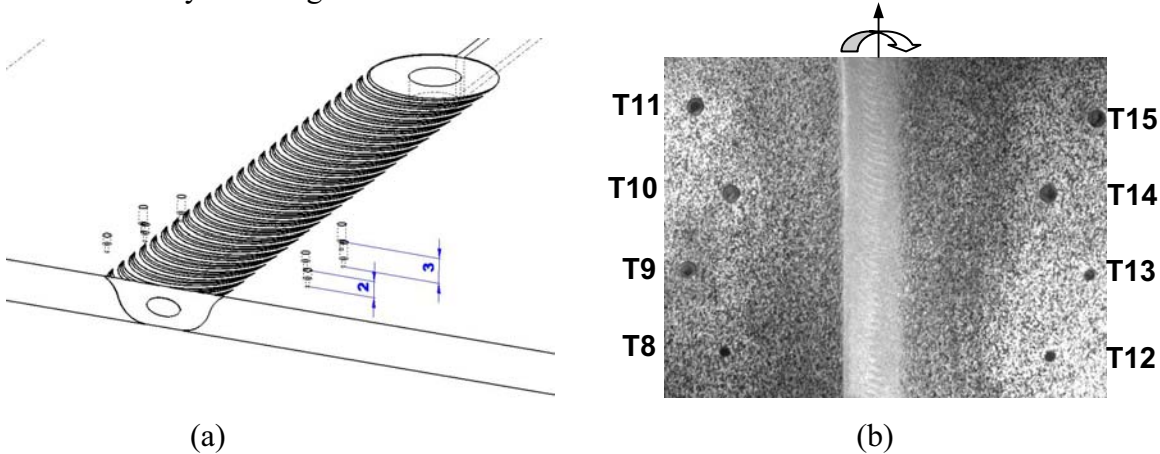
Scheme of the FSW joint in (a) and top surface macrograph in (b) showing the position of the thermocouples for the temperature measurements in the workpiece.
